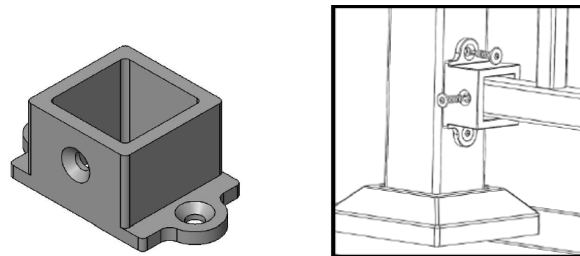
CB-05 COLLAR BRACKET AND INSTALLATION DETAIL FOR THE Fe²⁶ PLUS RAIL
